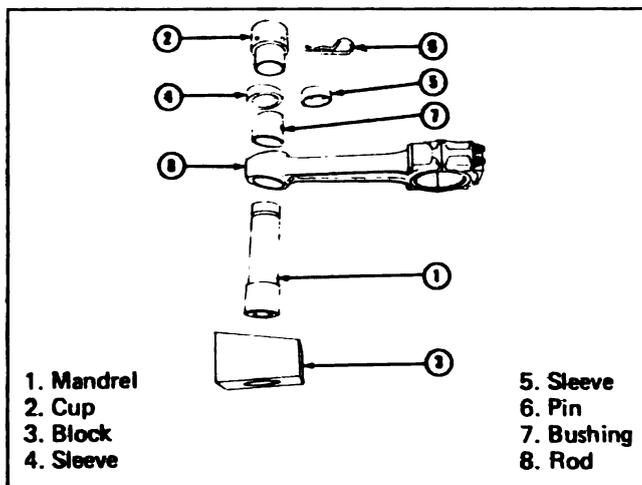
(N10158). The ST-1242 Bushing Driver.
